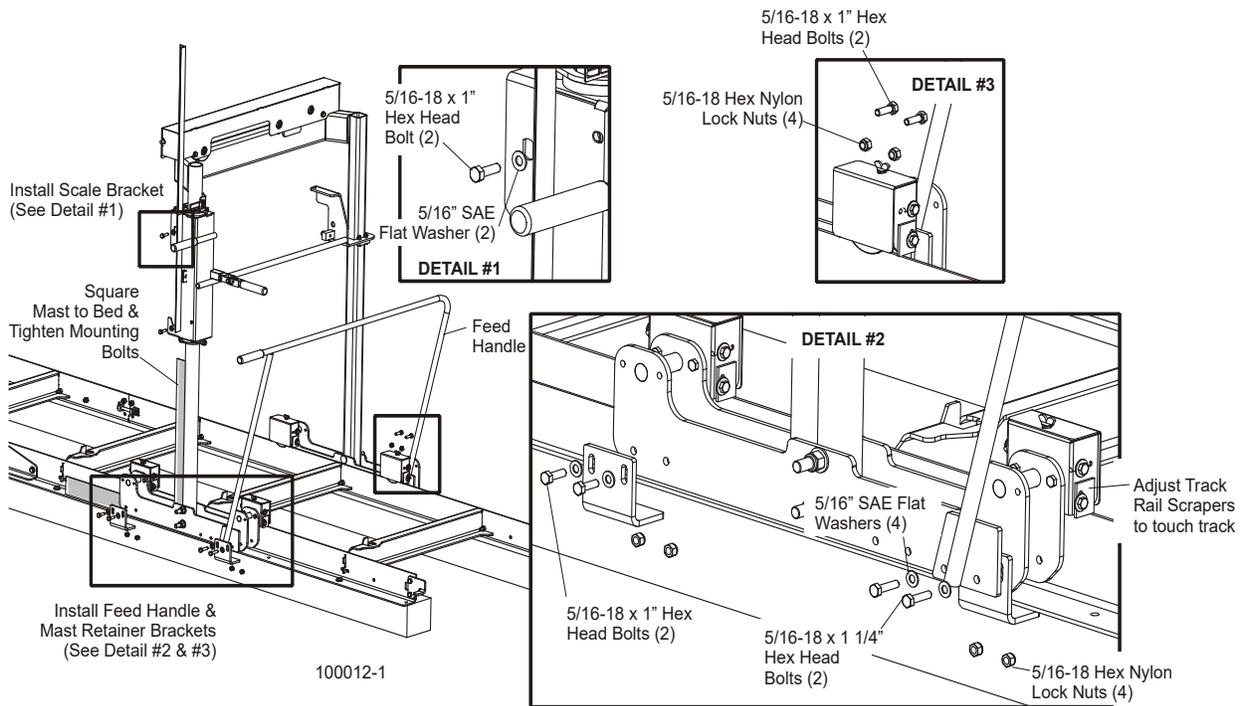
PRE-ASSEMBLED SAW HEAD (AFTER 4/08) NOT SHOWN
